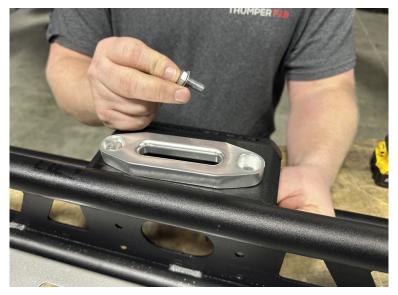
Fasten Fairlead (5) to Frame (1) using 13mm Socket and 14mm Wrench
